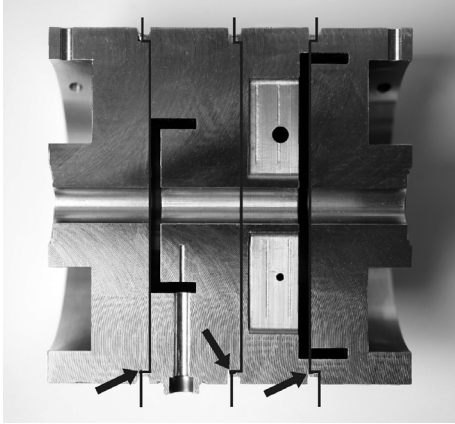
Cavity beam position monitor (E-XFEL prototype) in cutaway view, brazed with copper foil 2.0091 DIN EN 1044 CU 104 as an example of a vacuum component with hardly accessible joints. (Courtesy of the Deutsches Elektronen Synchrotron Hamburg.)
